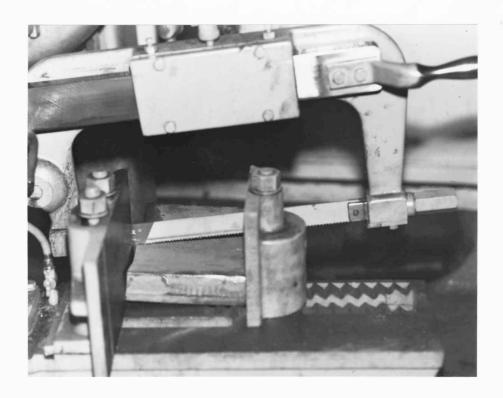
Sawing the Small Plates to Obtain a Welding Joint
